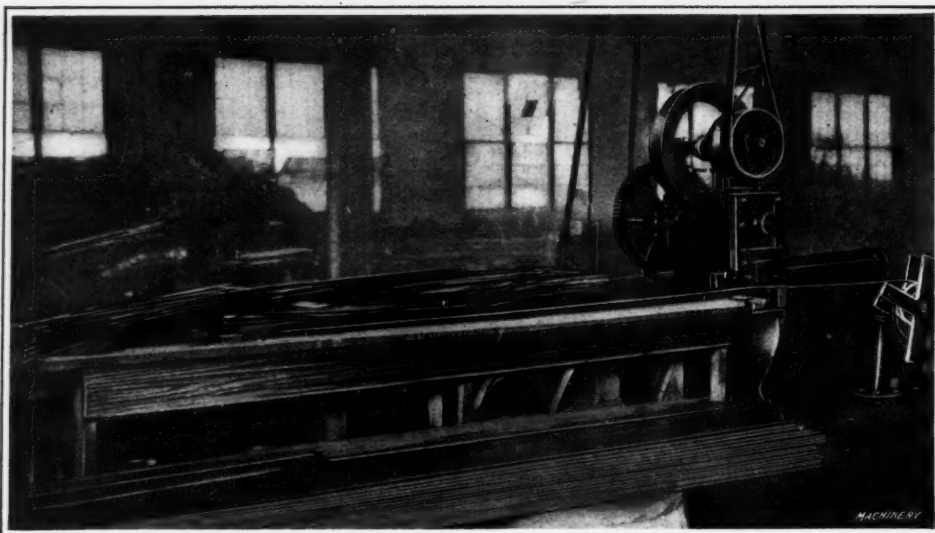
Cutting Bench and Shear for cutting up Strip Steel into Stock Lengths
